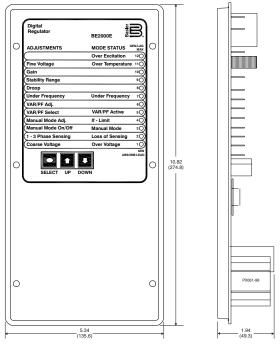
BE2000E Dimensions in Inches (Millimeters)
